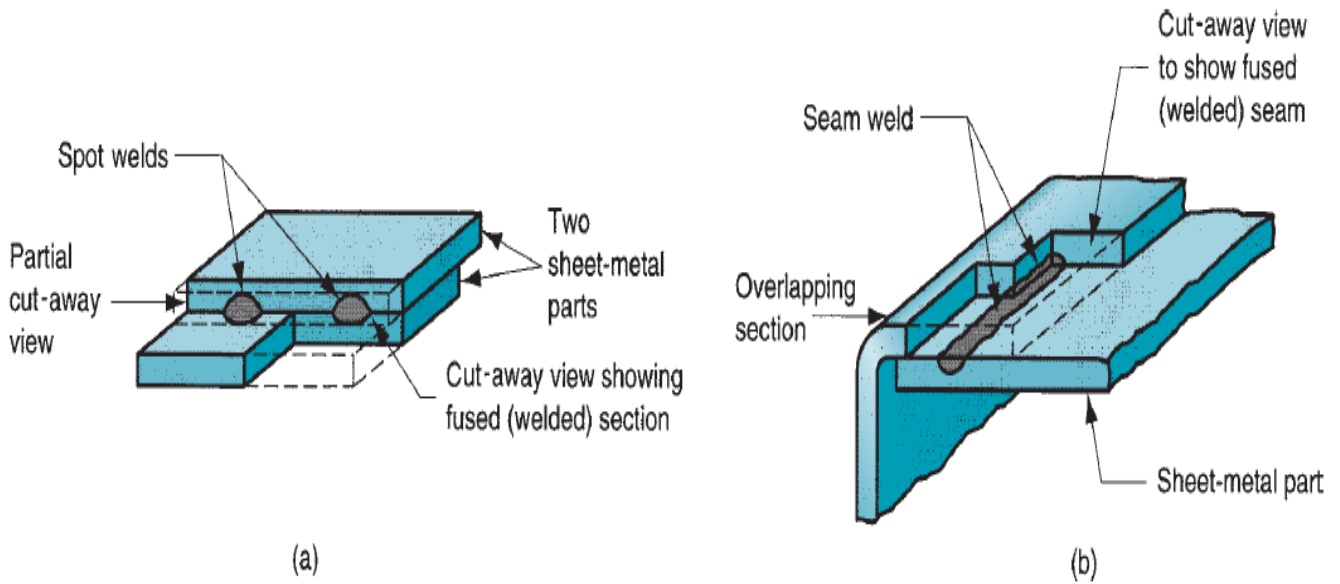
(a) spot weld, and (b) seam weld
